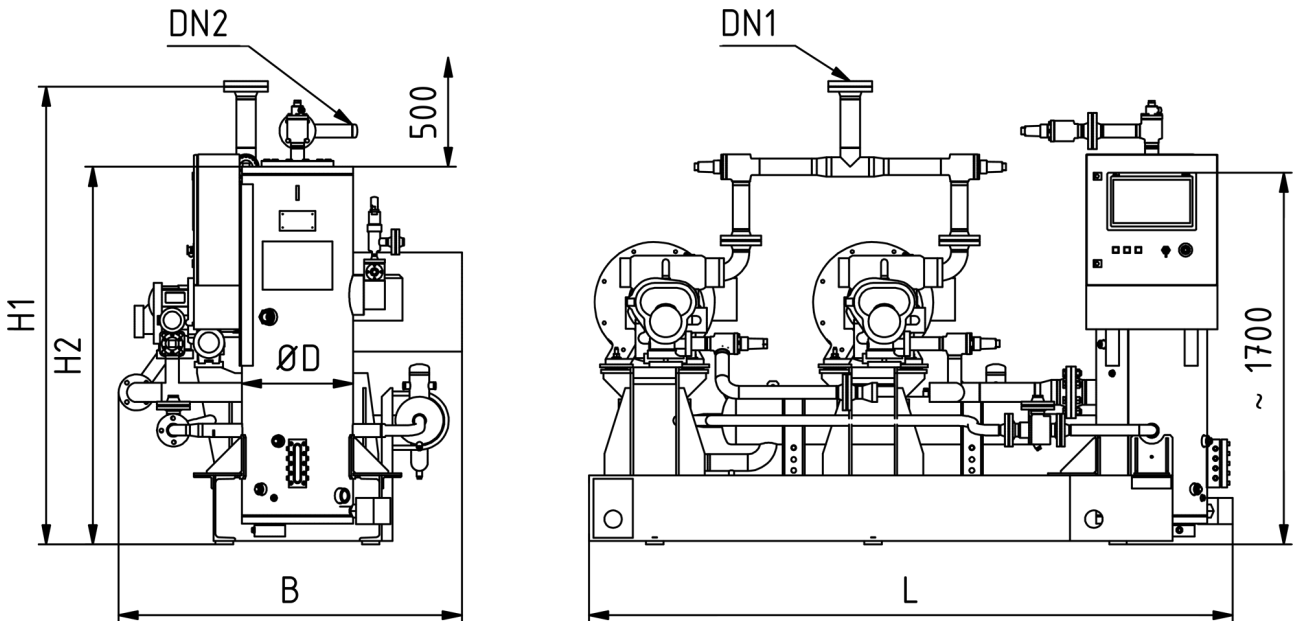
GEA Grasso SPduo compressor, frame size H, L
